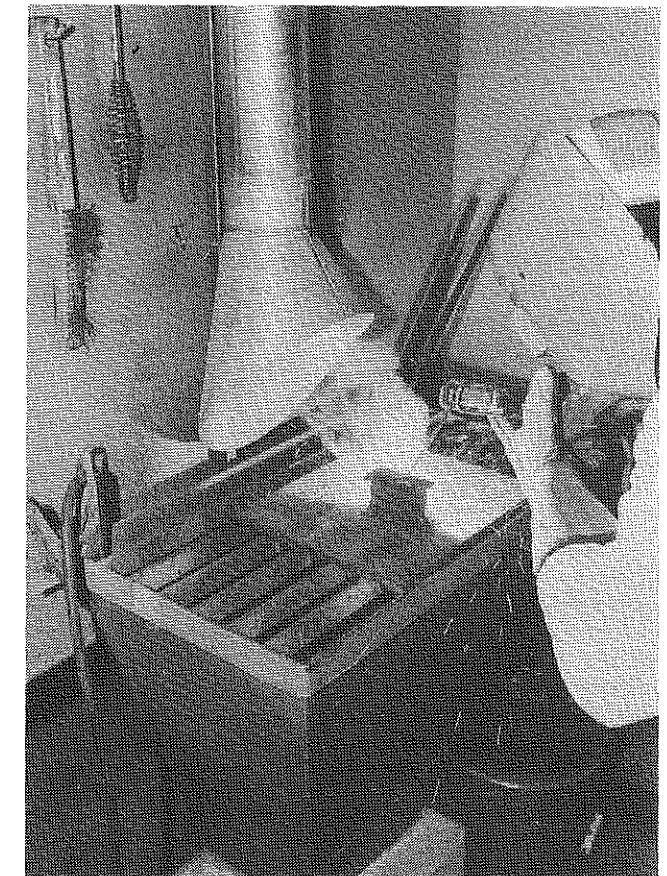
Intake hood is attached to welding screen; support bracket slides on 3/4" square tubing to allow hood to be raised for out-of-position welding. NOTE: Metal welding plate on table is required to direct air flow into hood and away from worker.
